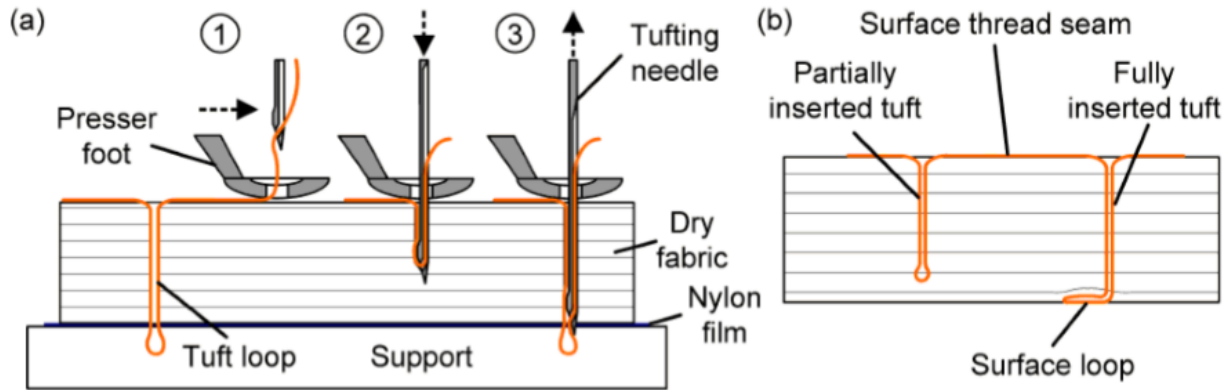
Tufting process (a) Tufting insertion steps and (b) surface thread seam showing partially and fully inserted tuft [224]
